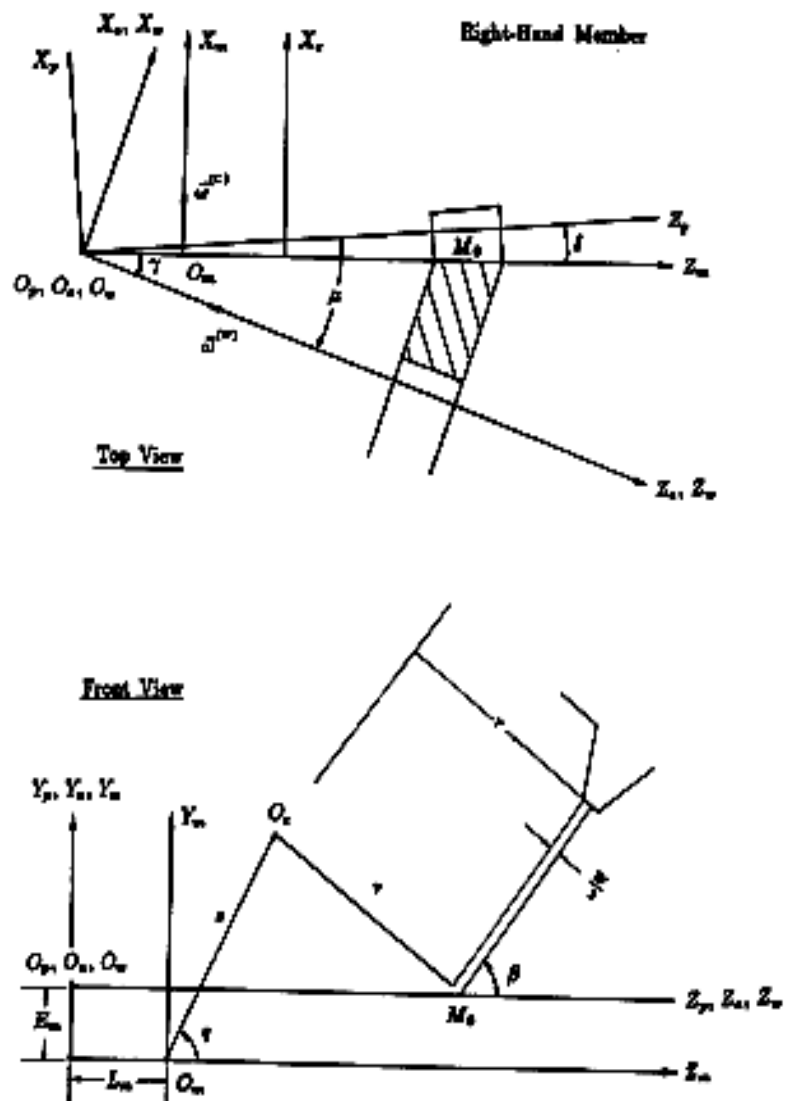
Top And Front Views Of Right-Hand Gear Generator.
